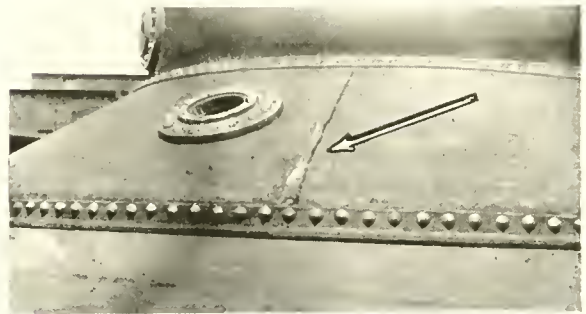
This conical sheet was welded at the point shown, in order to avoid a double lap at the edge of the work which would have been difficult to rivet.
